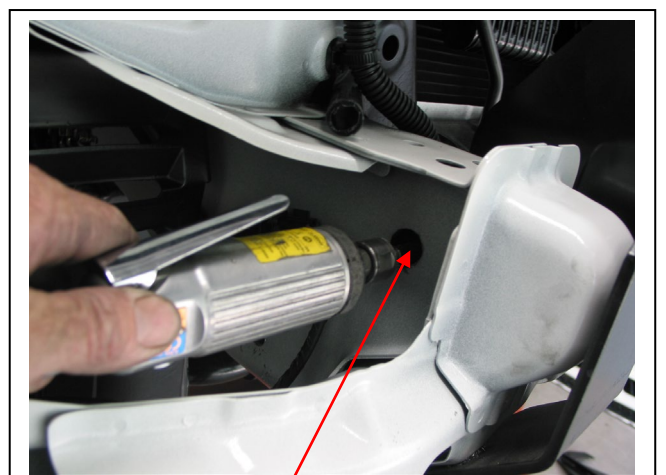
Enlarging outer chassis hole to 17mm for chassis spacer
